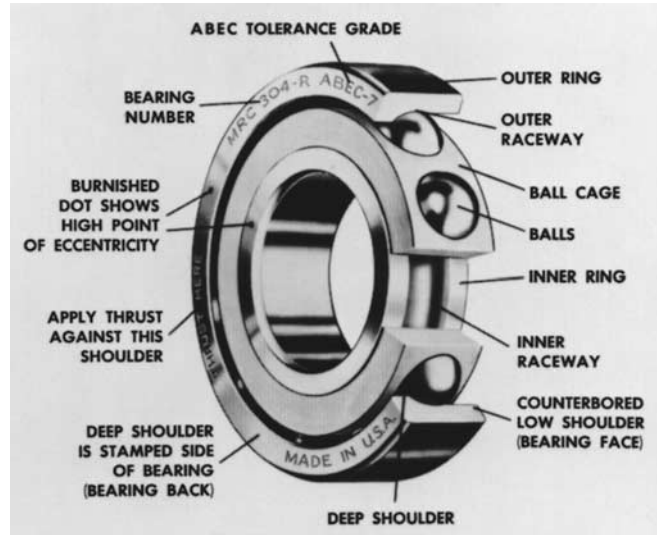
Photograph of a precision ball bearing of the type generally used in machine-tool applications to illustrate terminology. (*Bearings Division, TRW Industrial Products Group.*)
